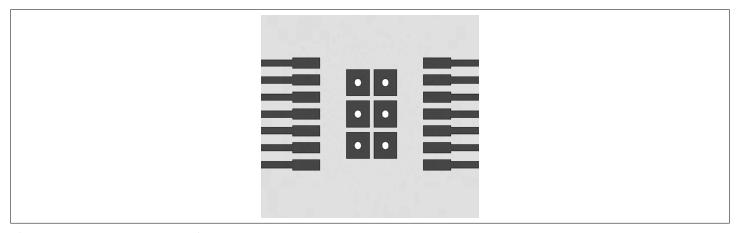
Thermal vias on PCB for 2s2p PCB setup
